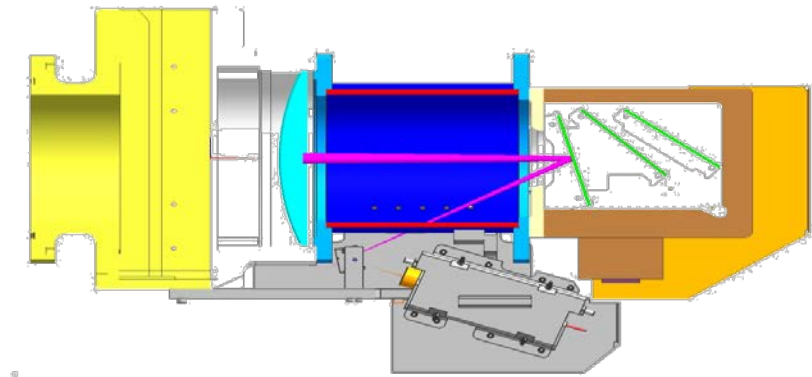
Drawing of the pattern generator assembly. The reticle projector fits within the housing and is adjusted by the set screws located around the sides.
